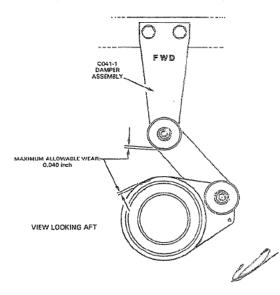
TAIL ROTOR DRIVE SHAFT DAMPER REARING INSPECTION
